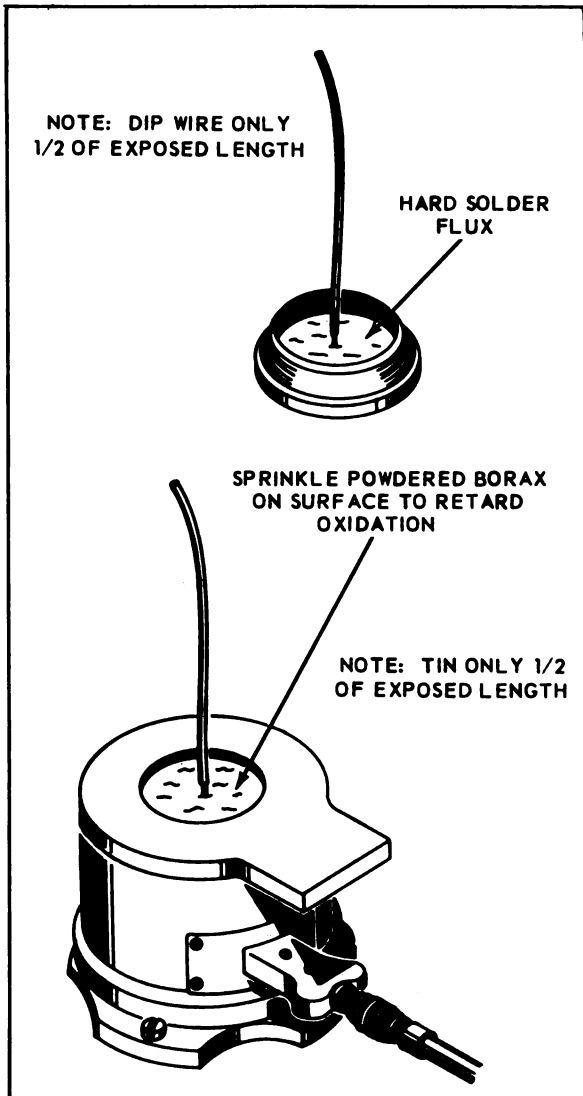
Dip Tinning Thermocouple Wire in Silver Solder
